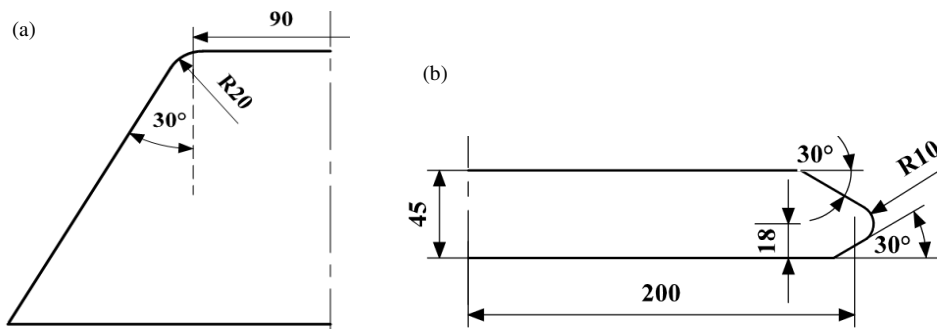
Dimension of (a) mandrel and (b) rollers (unit: mm)
